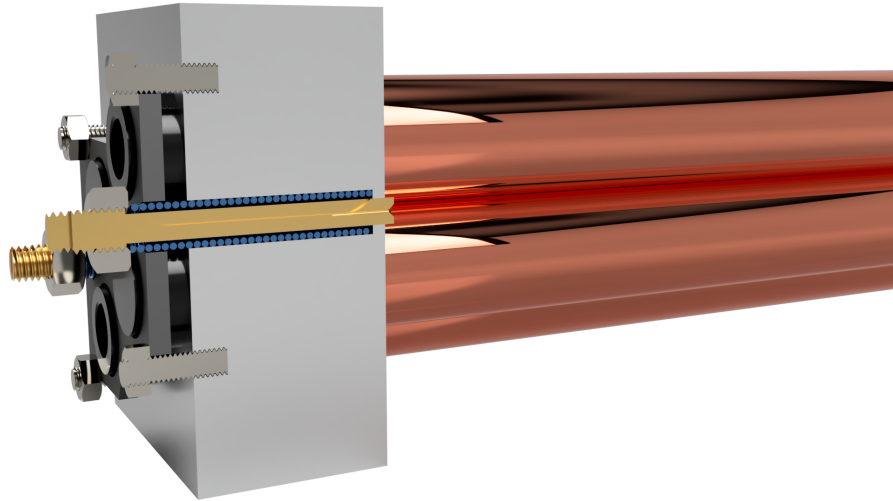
Cut through a possible redesign of the quad-straw prototype's endplate to accommodate a spring, which, for reasons of clarity, is depicted in blue. The spring pushes a nut, which is screwed on to the head of the carbon fibre holder, outwards. The carbon fibre tow is not depicted in this image.
